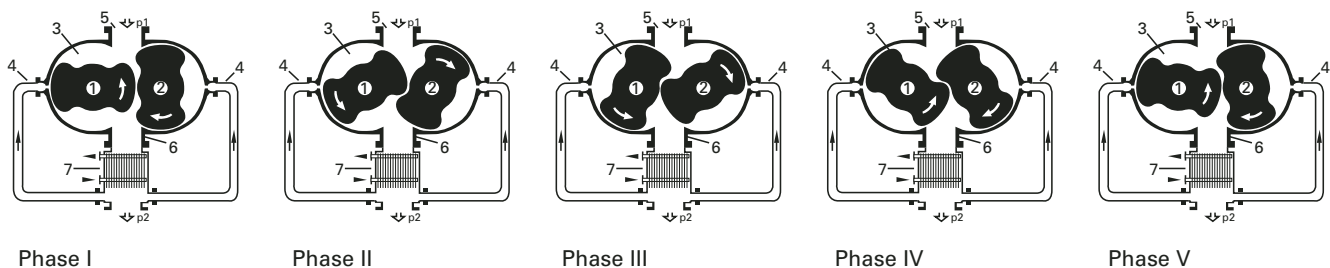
Principle of the circulatory gas cooled Roots vacuum pumps (WGK, Pfeiffer Vacuum GmbH).
